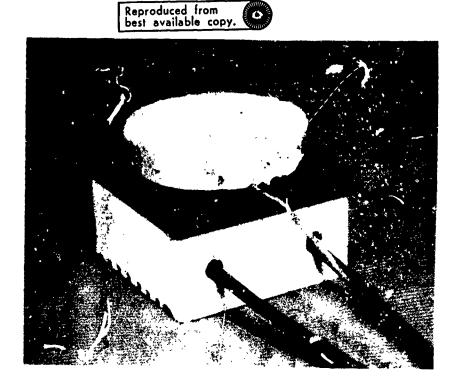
HEAT-TREAT ENSEMBLE USED FOR ON-HEATING CRACK-SUSCEPTIBILITY TESTS. TONGS INSERTED IN BASE ARE USED FOR SPECIMEN TRANSPORT PURPOSES.
